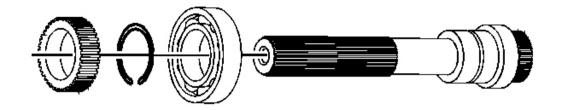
Rear Output Shaft Courtesy of GENERAL MOTORS CORP.
